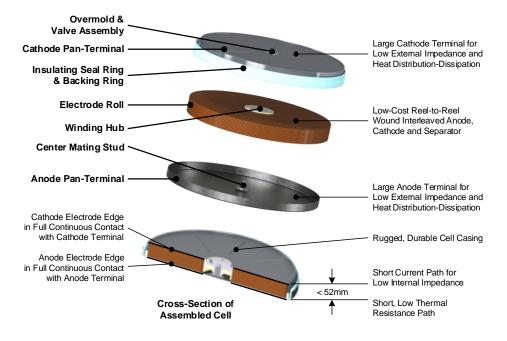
Exploded View of Rolled-Ribbon Cell and Cross-Section of Assembled Cell
